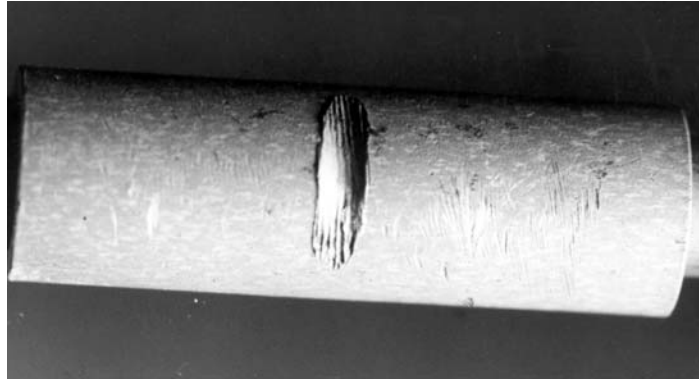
Wire rope impression imprinted on the spacer tube due to digging in of wire rope
